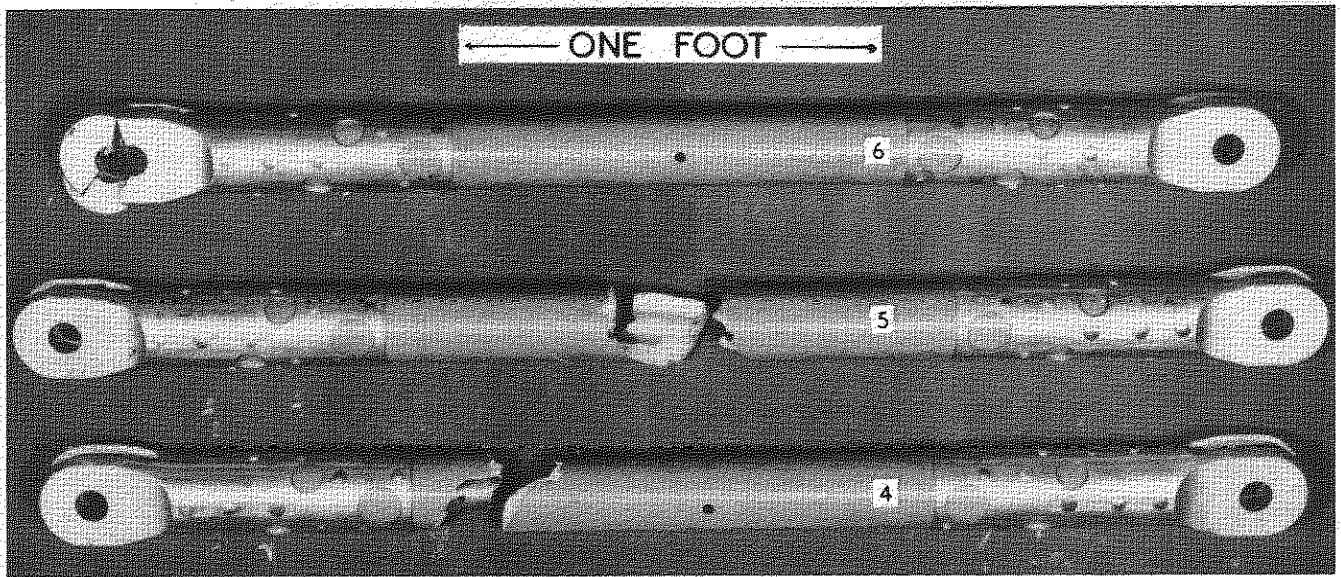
SHOWING TYPE 2 SPECIMENS OF SPAR TUBES WITH TRANSVERSE HOLES
